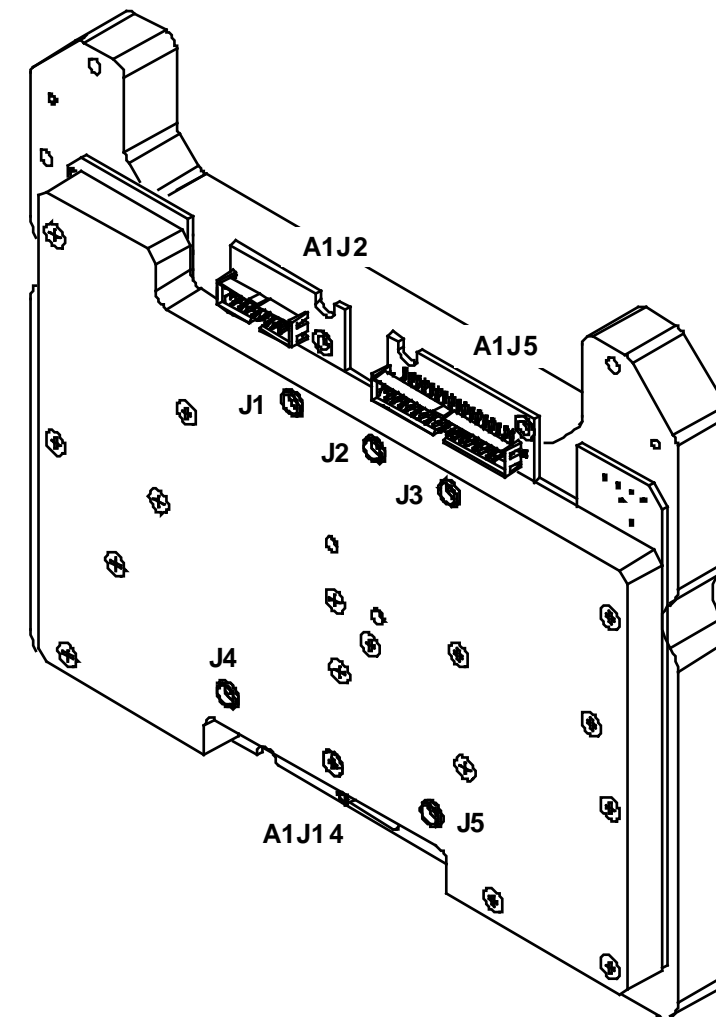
Multi-Function PCB Assy (Sheet 3 of 3)
